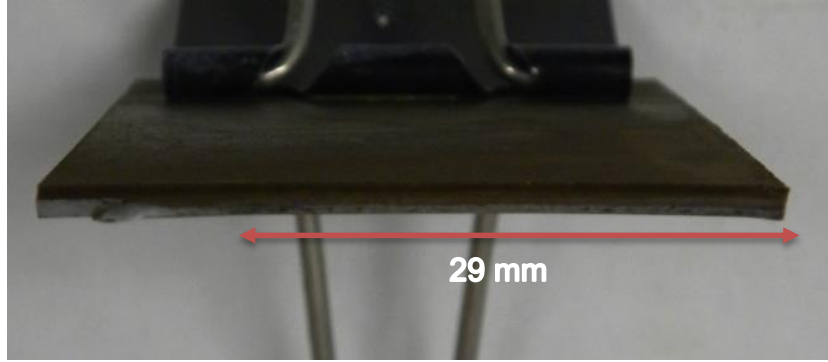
Photo of fracture surface of sample F3 (90%)
